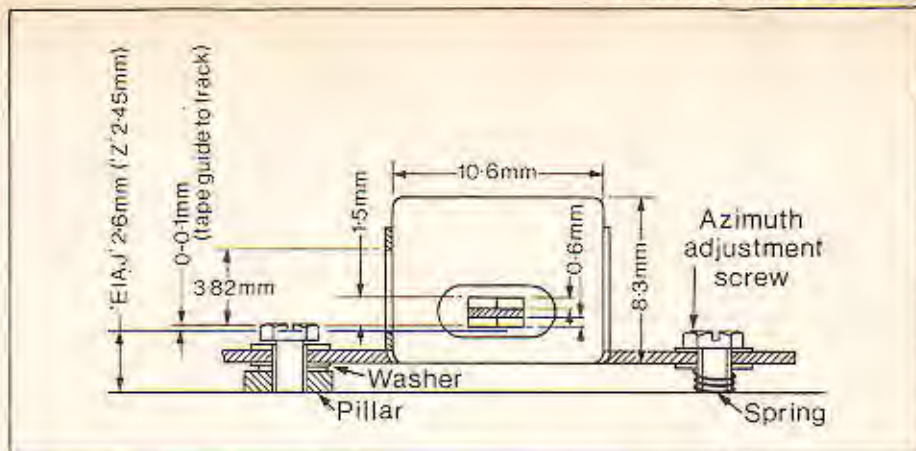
Specified dimensions for cassette record/replay heads and method of mounting used on Staar mechanisms.
